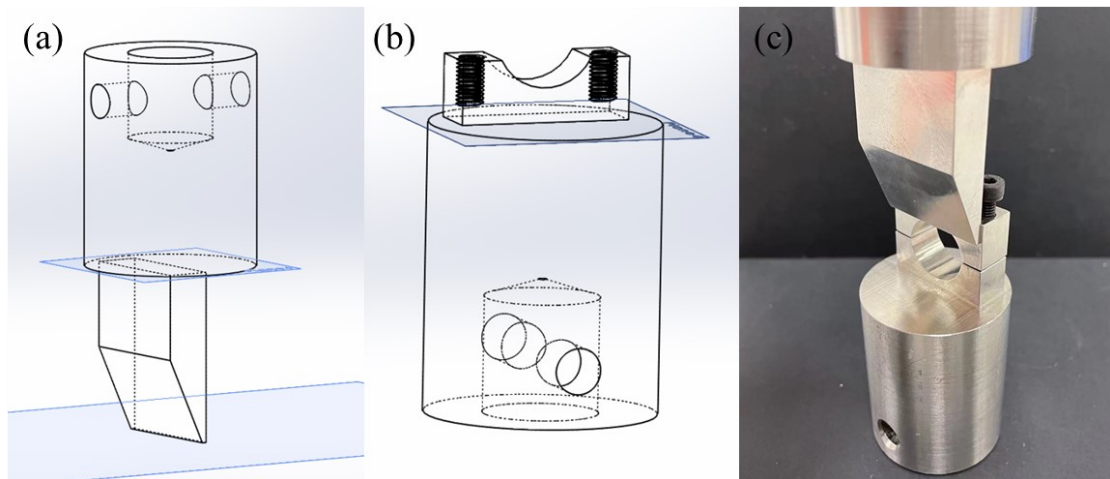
Universal shear testing rig designed by Solidworks. (a) top component is designed as a one-sided cutting blade with 1 mm of blade width and (b) bottom component is designed suitable for 10-18mm diameter of cylinder sample and the screw size is M4*20mm. Both top and bottom components have pin hold for the fixation on
